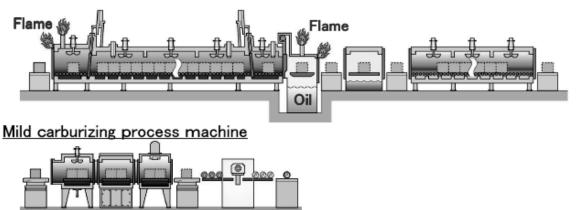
Cross section of continuous gas carburizing furnace and Mild carburizing process machine.
